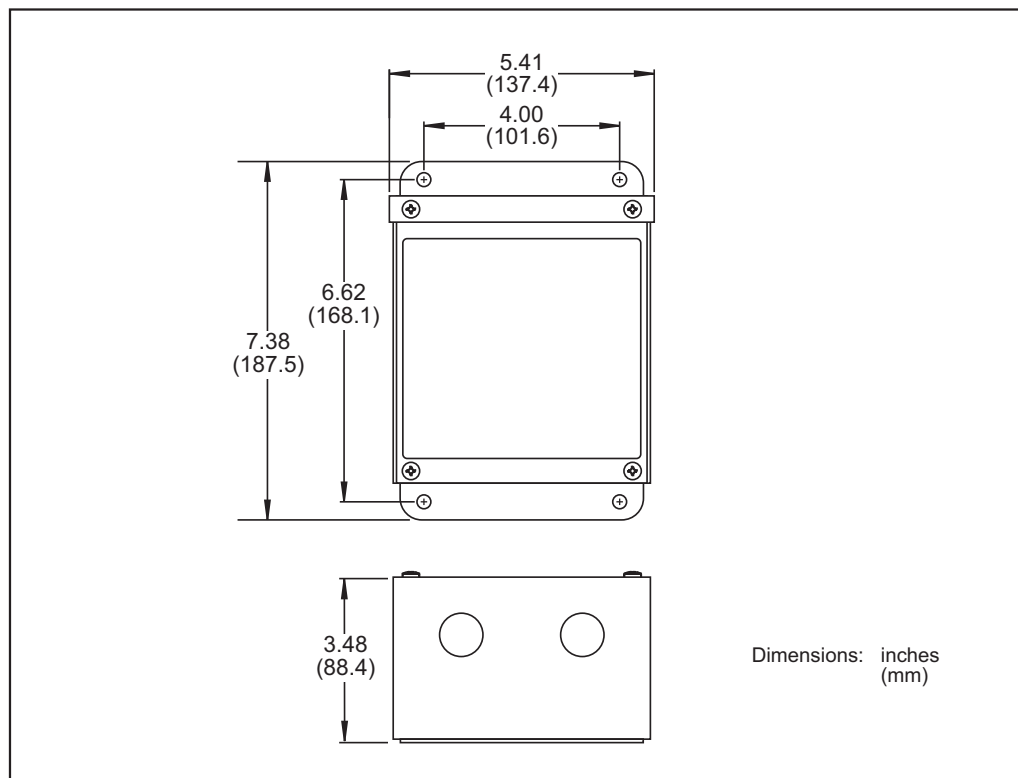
Cam Output Enclosure: Mounting Dimensions
